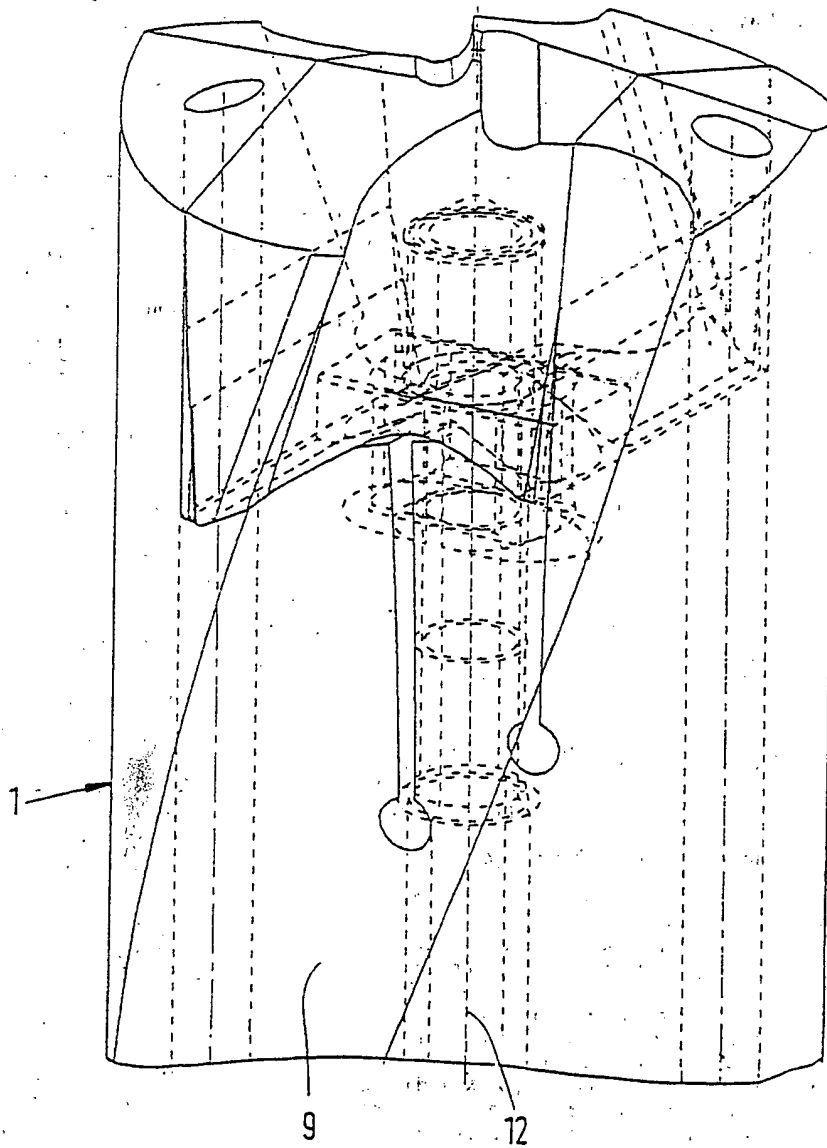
is a perspective view of a mechanical assembly, likely a container or housing, showing internal components. The assembly is a rectangular box with a lid. Inside, there is a central vertical shaft with several horizontal discs or rings. A label '1' points to the left side of the box. A label '9' points to the bottom of the box. A label '12' points to the central vertical shaft. Dashed lines indicate hidden internal components.
